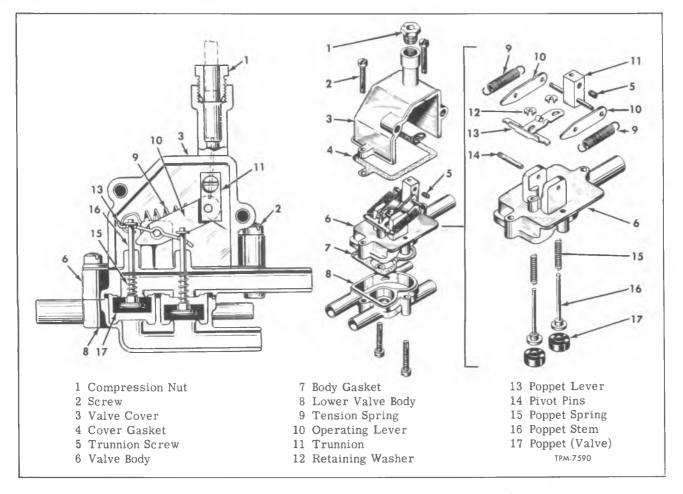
Sectional and Disassembled Views of Vacuum Control Valve
